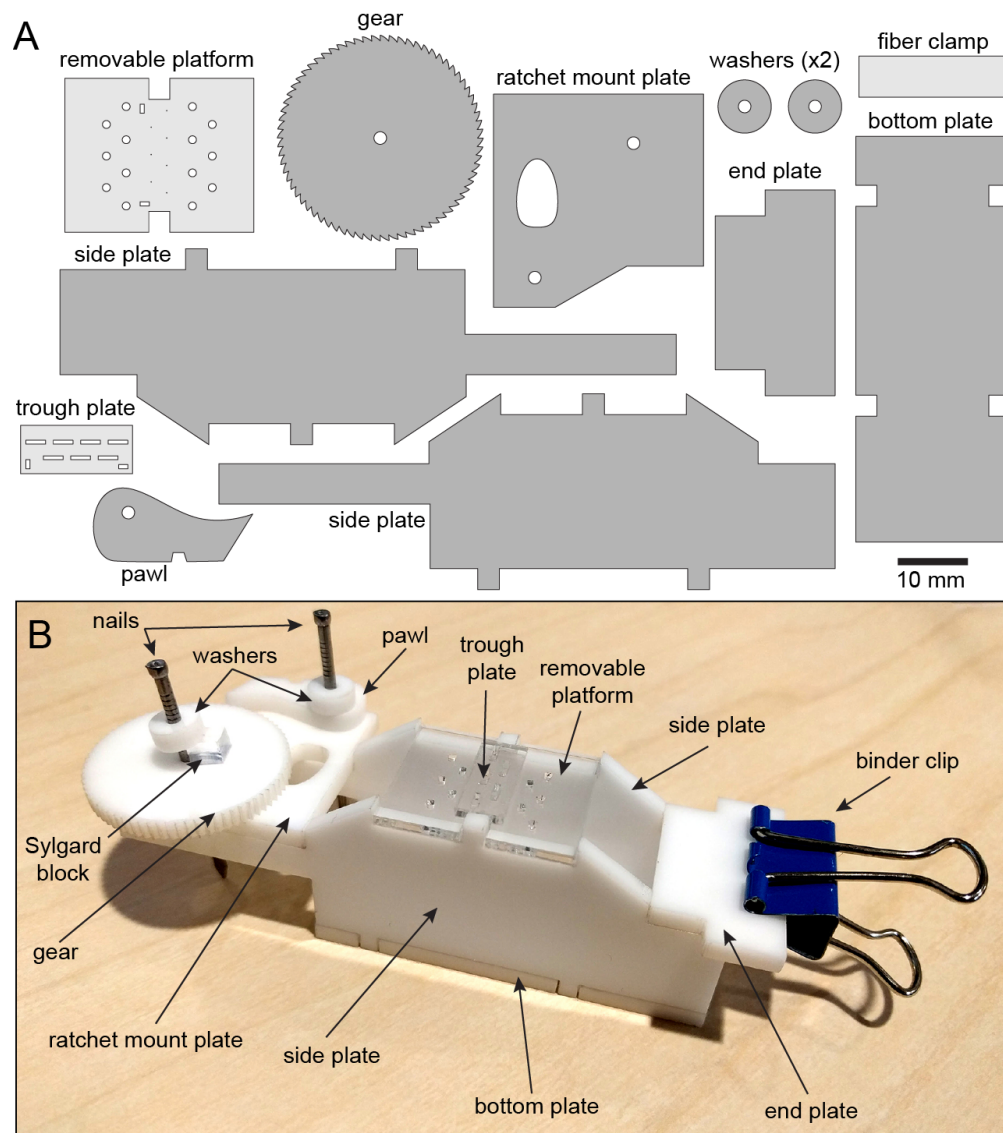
Assembling a device for constricting embryos. A, Diagram of all acrylic components. We cut the light gray pieces from 1.59 mm-thick acrylic sheet. We cut the rest from 3.18 mm-thick acrylic sheet. B, The assembled device also included a binder clip and two steel nails. Before welding the trough plate to the removable platform, we positioned trough plate so that the rectangular holes in the platform lined up with the corresponding holes in the trough plate. After the rest of the components were welded together as shown, we inserted one steel nail through a washer, then through the pawl, then through the ratchet mount plate. We applied hot glue to the top of the washer, fixing it to the nail. We also applied hot glue to the underside of the ratchet mount plate where the nail emerged, fixing the nail to the plate. We used a straight edge razor to cut a block of Sylgard elastomer with approximate dimensions 4 mm × 8 mm × 8 mm, and then sliced the block through half its depth when oriented with the largest face flat on a table. We inserted the second nail through the other washer, gear, and then the ratchet mount plate. We positioned the Sylgard block as shown, and then hot glued to the gear. We applied hot glue to the top of the second washer, fixing it to the nail. Finally, we applied more hot glue to the nail where it emerged underneath the ratchet mount plate, fixing it in place.
